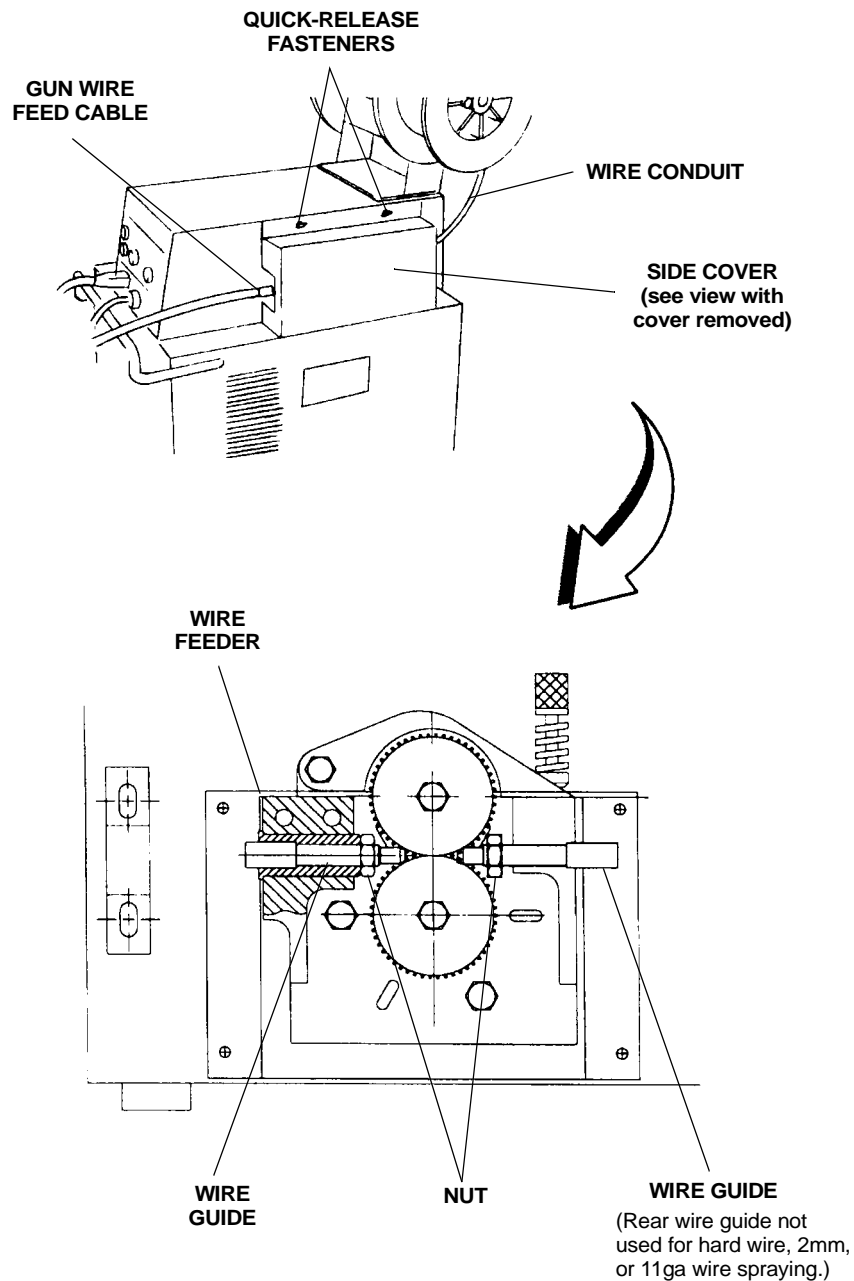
WIRE GUIDE INSTALLATION – CONTROL UNIT
